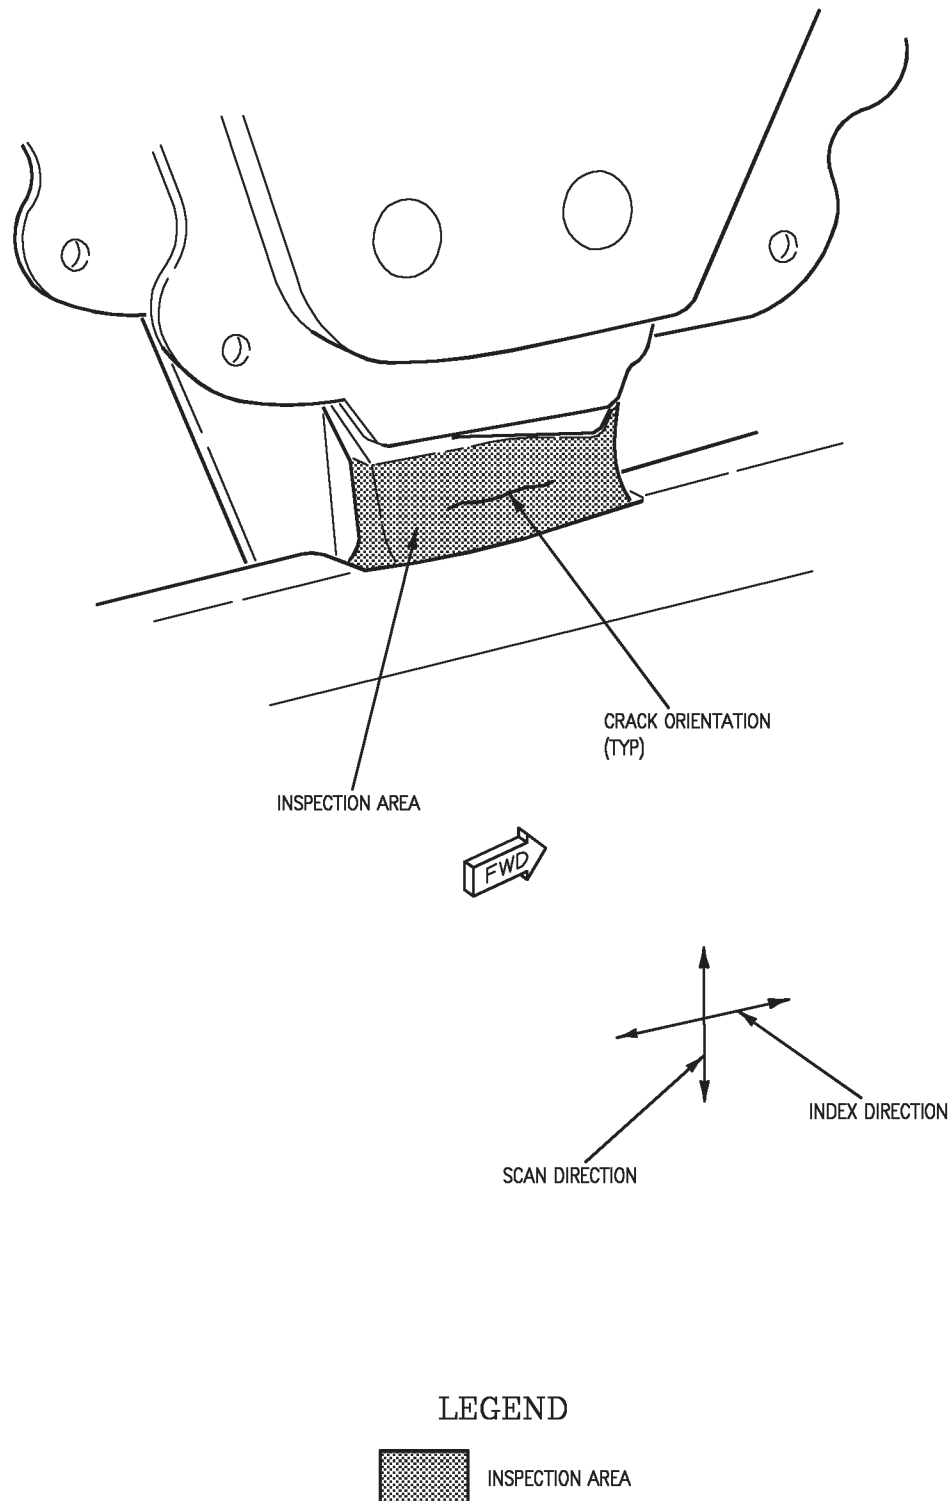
Location of Formers and Inspection Areas (Sheet 2)
